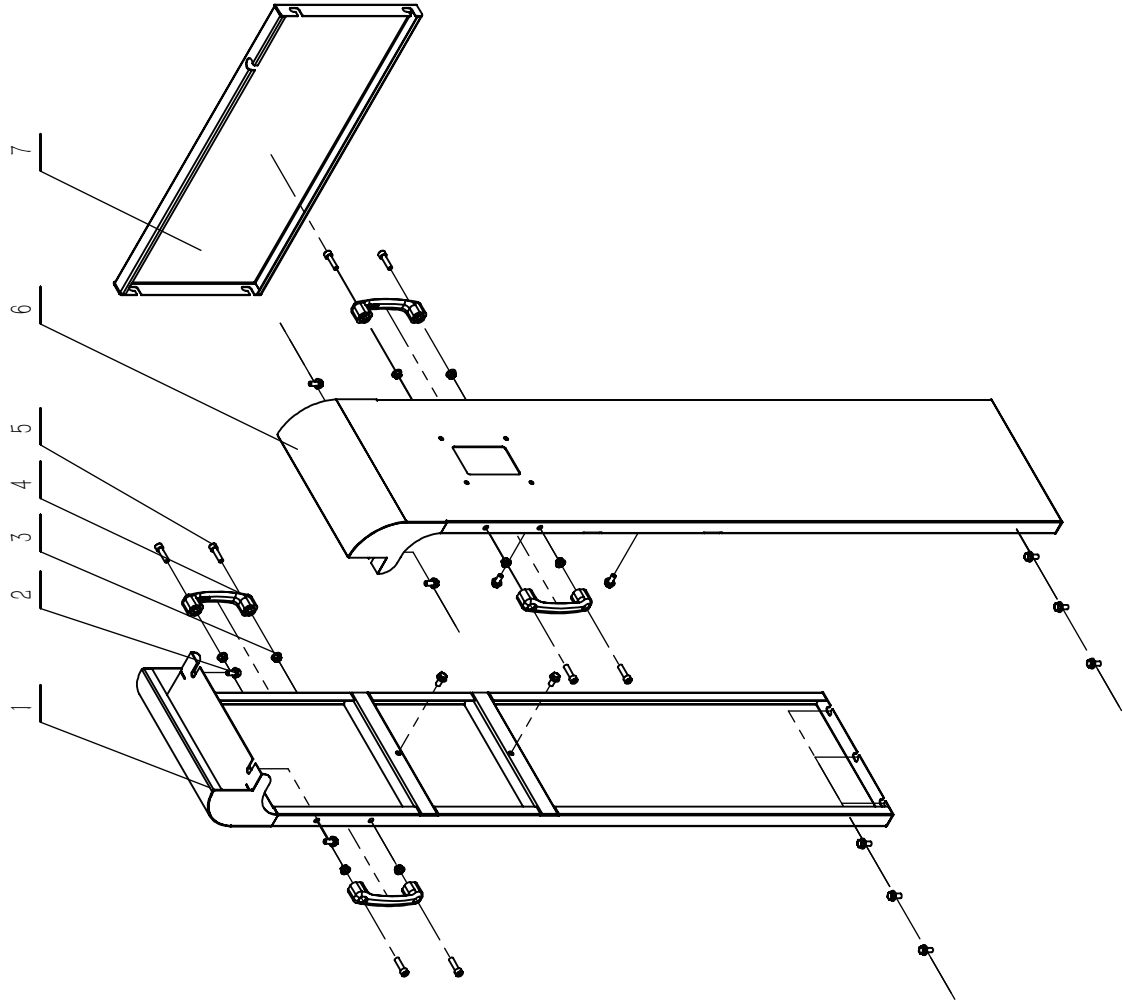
DUST BUCKET ASSEMBLY-SHEET E
